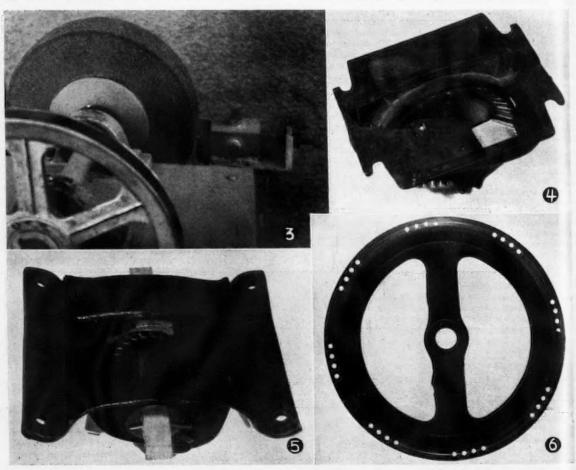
Close-up view of silicon-carbide wheel and adjustable shear bar of beet seed shearing machine ● Fig. 4 Modified seed metering unit for an internal-run type of beet drill. The feed wheel has 40 futes on a 45-deg bevel. The metering plate is shown midway alongside of the wheel ● Fig. 5 Modified external fluted-feed mechanism as built by the Minneapolis-Moline Power Implement Co. The tapered shield over the
